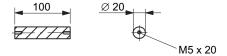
Dimension drawing for ANT D5 spacer kit
